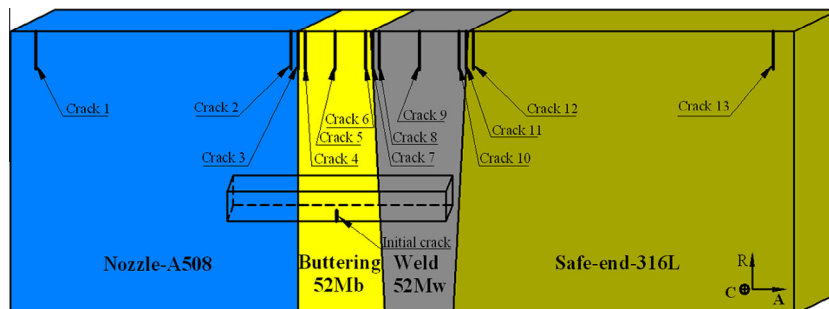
The four materials composed of the DMWJ and initial crack positions [25,26,28].
